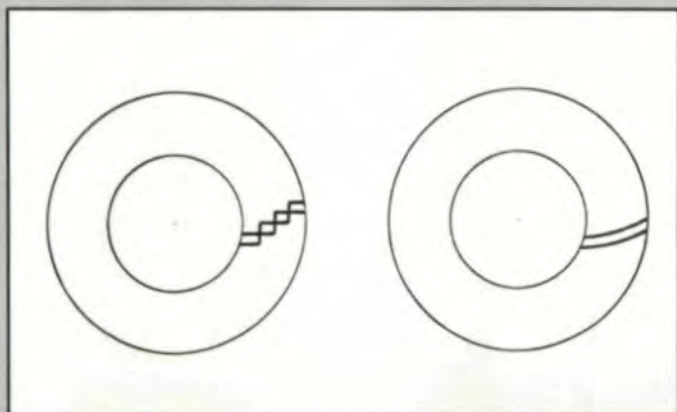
Spiral Bevel Gear as a Limiting Form of a "Stepped" Straight-Toothed Gear
